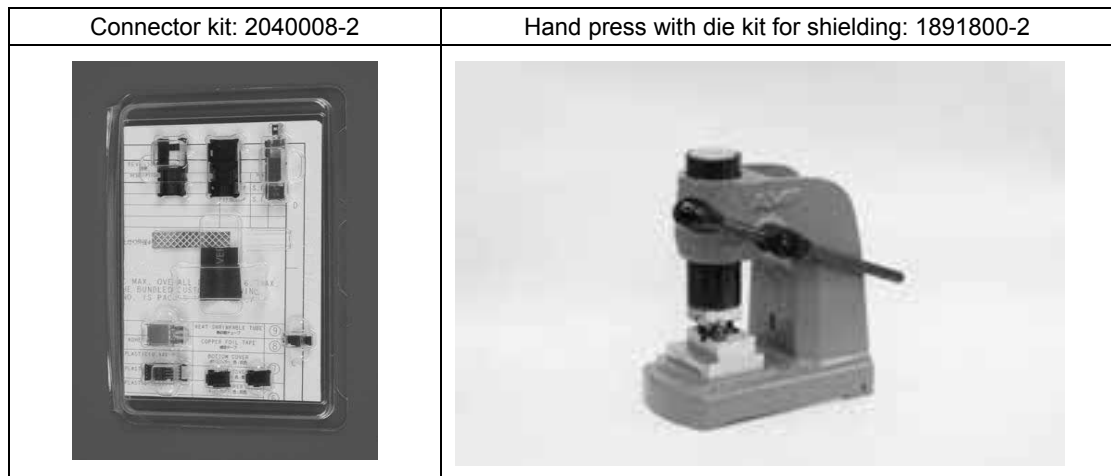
Appearance of Connector Kit Fig. 3-5 Appearance of Hand Press with Die Kit for Shielding
